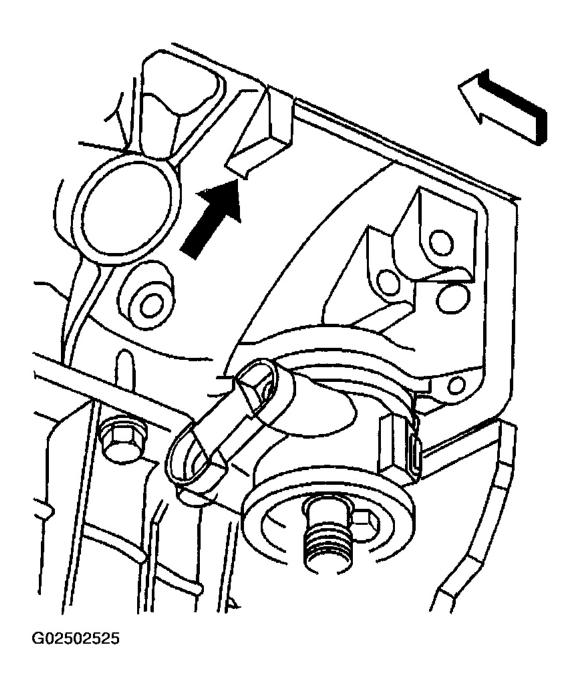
Locating Square Tab At Left Rear Side Of Engine Block Courtesy of GENERAL MOTORS CORP.
